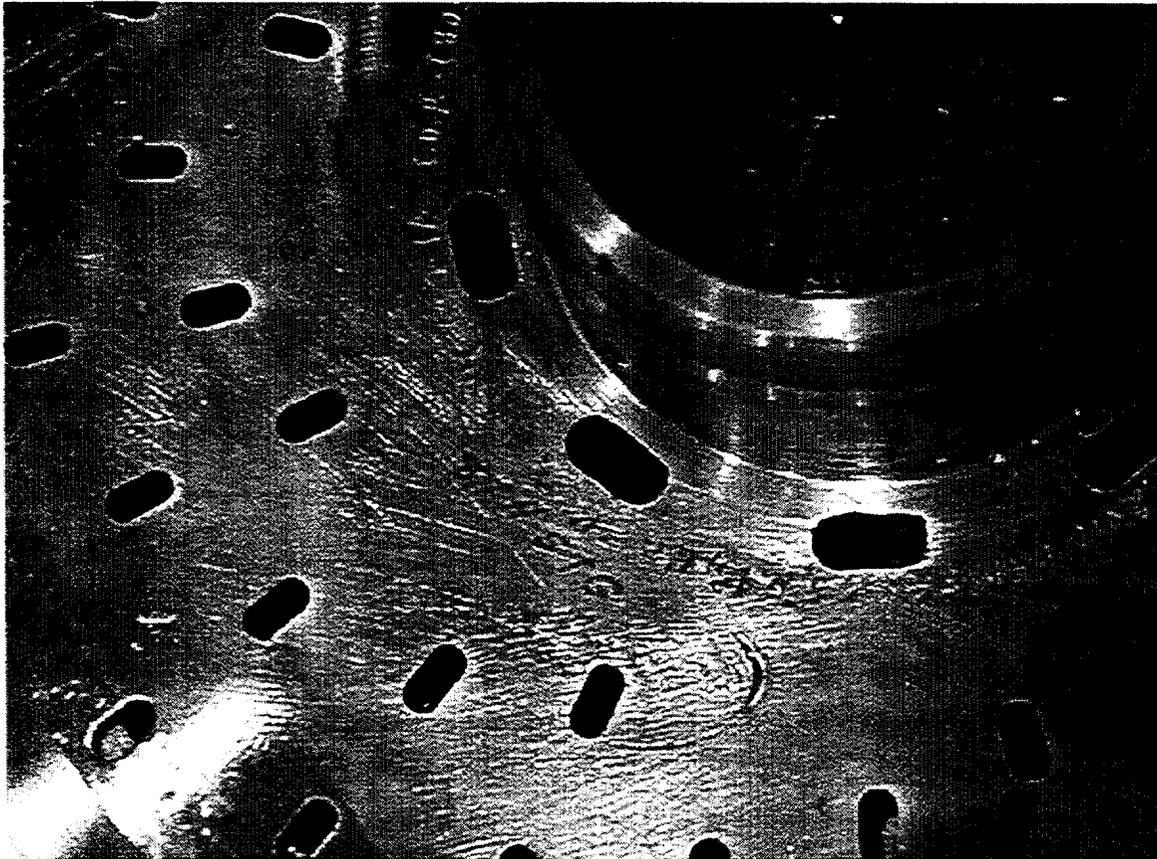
Patented design NCP Impeller Construction, unique balance hole construction.
